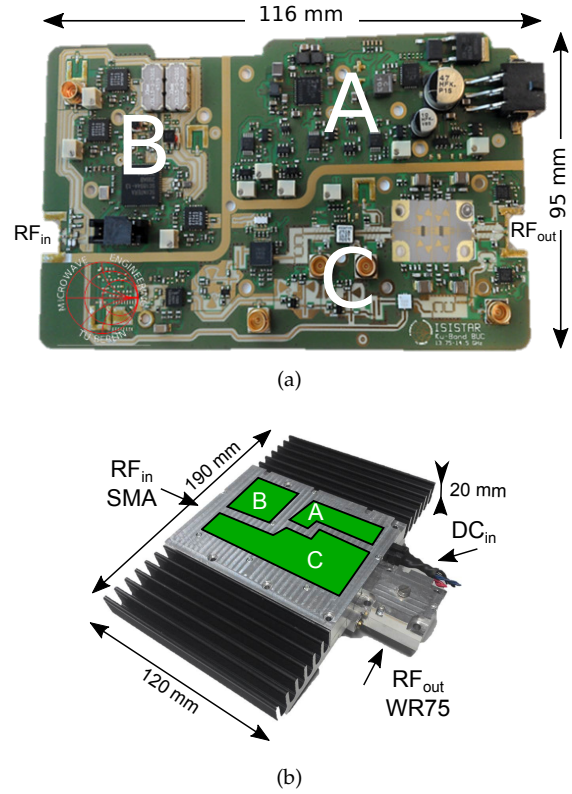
(a) Layout view of hybrid integrated BUC (b) with housing.
